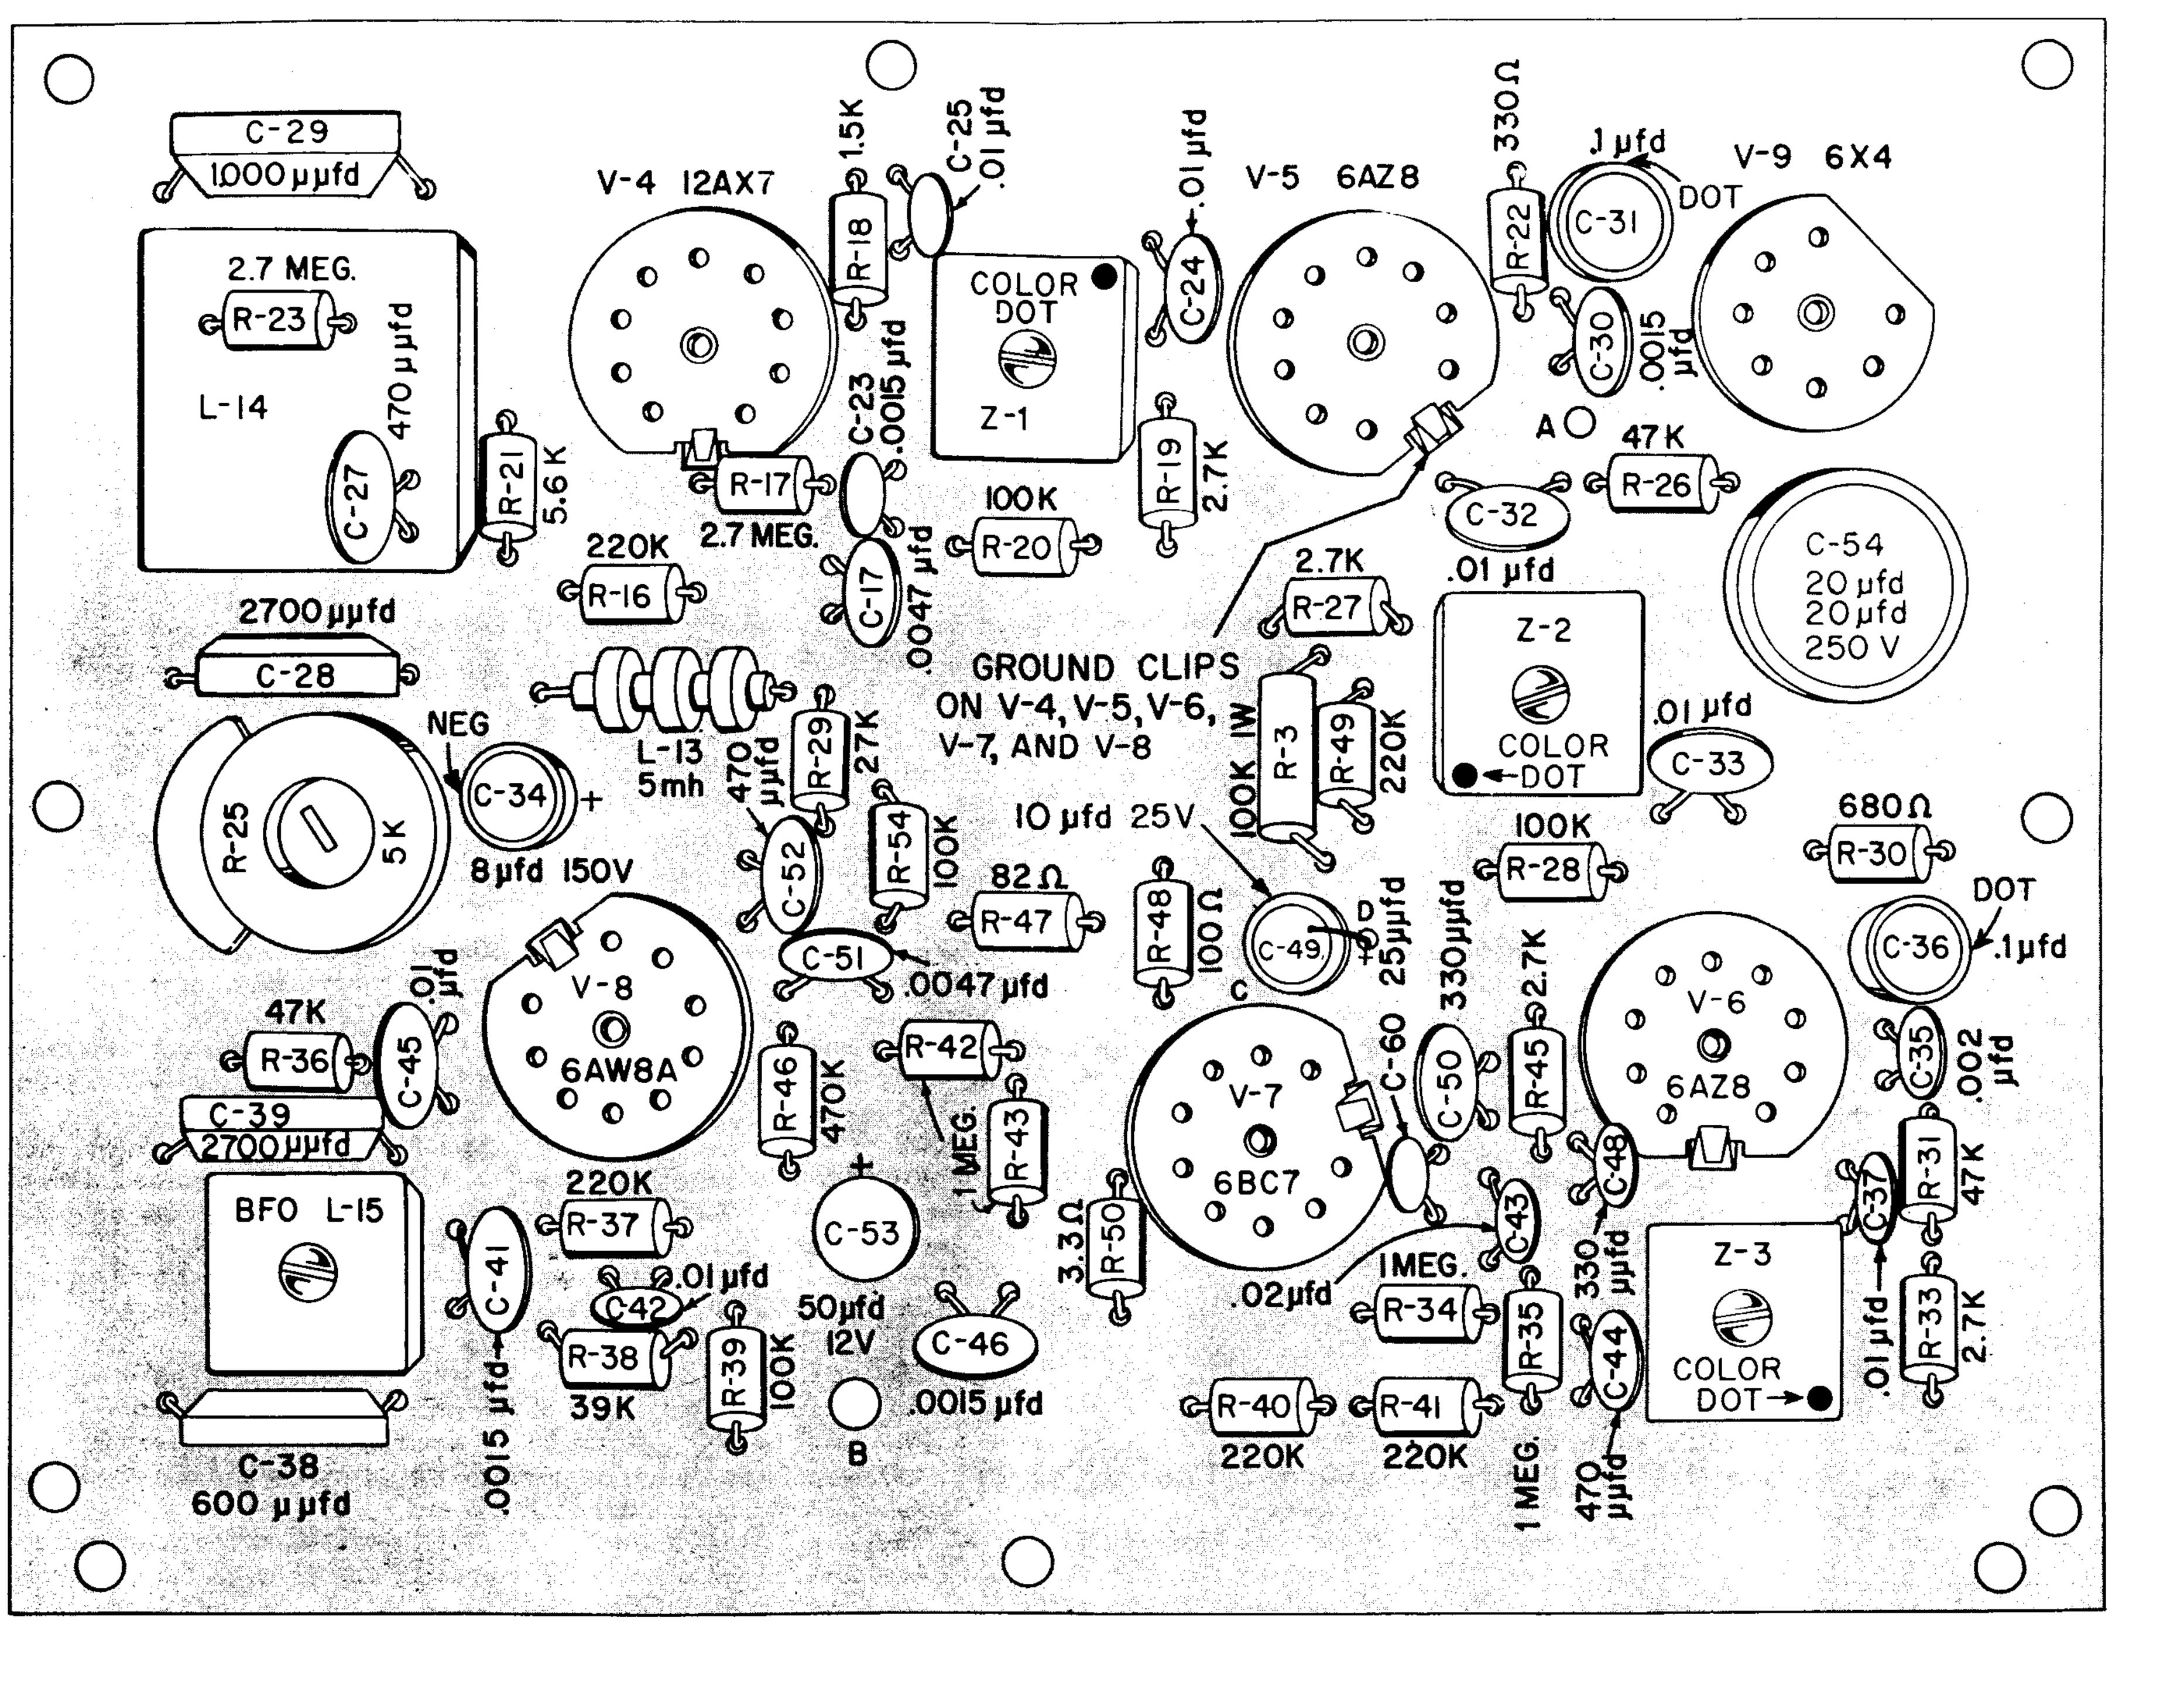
PARTS MOUNTING ON THE IF PRINTED CIRCUIT BOARD
